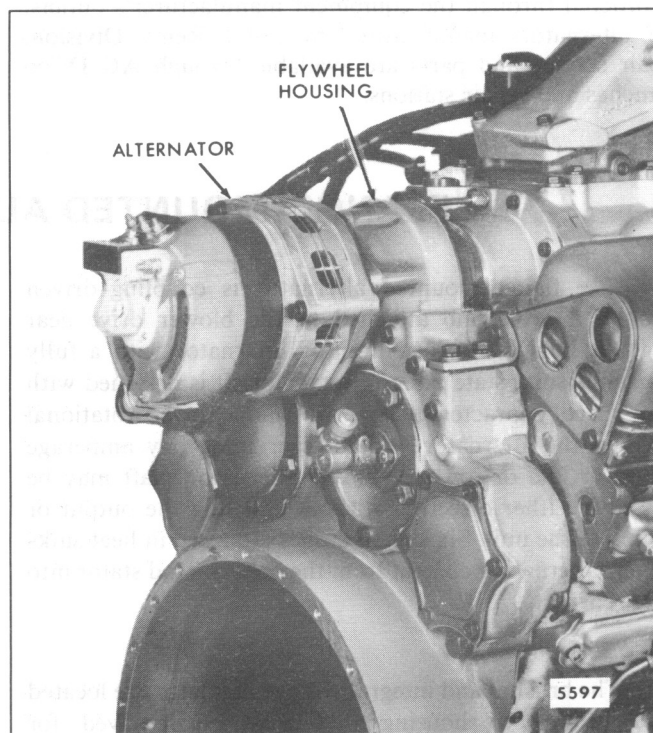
Typical Flange-Mounted Alternator (Beltless)
